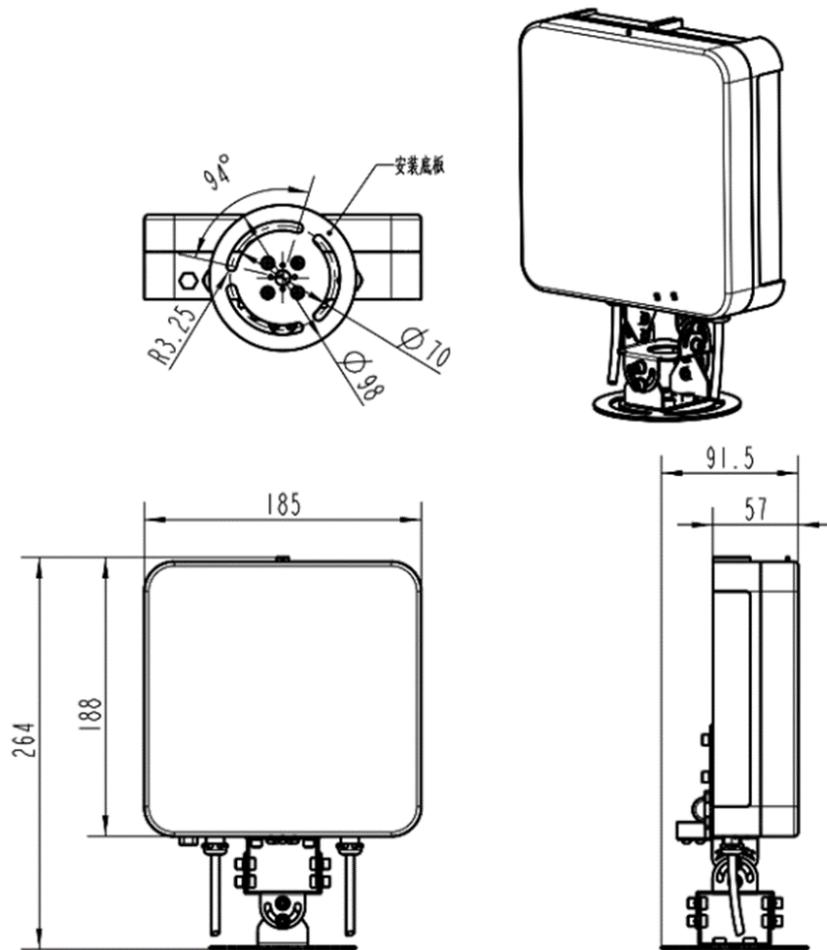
Radar ITSDETECTOR 24L-3 dimensions
